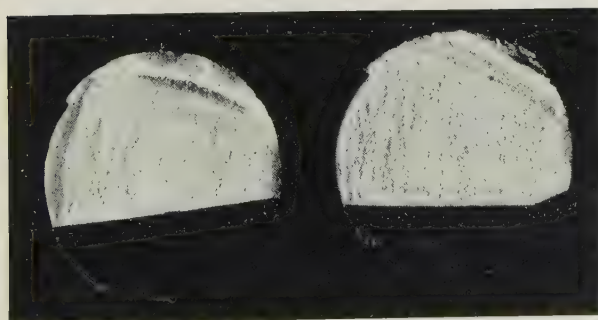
Hot-Spot Die-Casting and Production Casting in LM6 Alloy, Showing Identical Shrinkage Defects. (Scheuer.)
